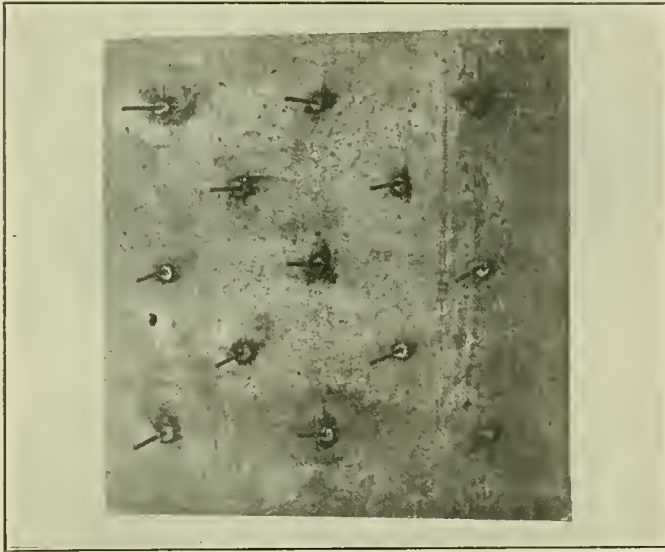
Nails Welded to Car Side to Hold Felt Lining
